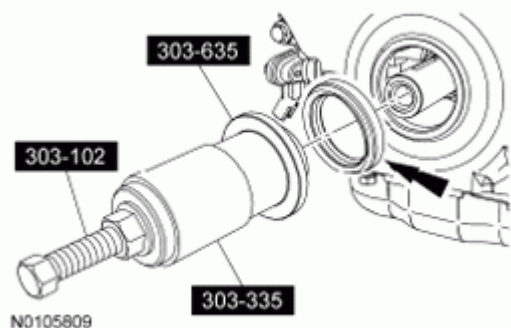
Identifying Crankshaft Vibration Damper Installer, Front Cover Seal Installer And Crankshaft Front Seal Installer
